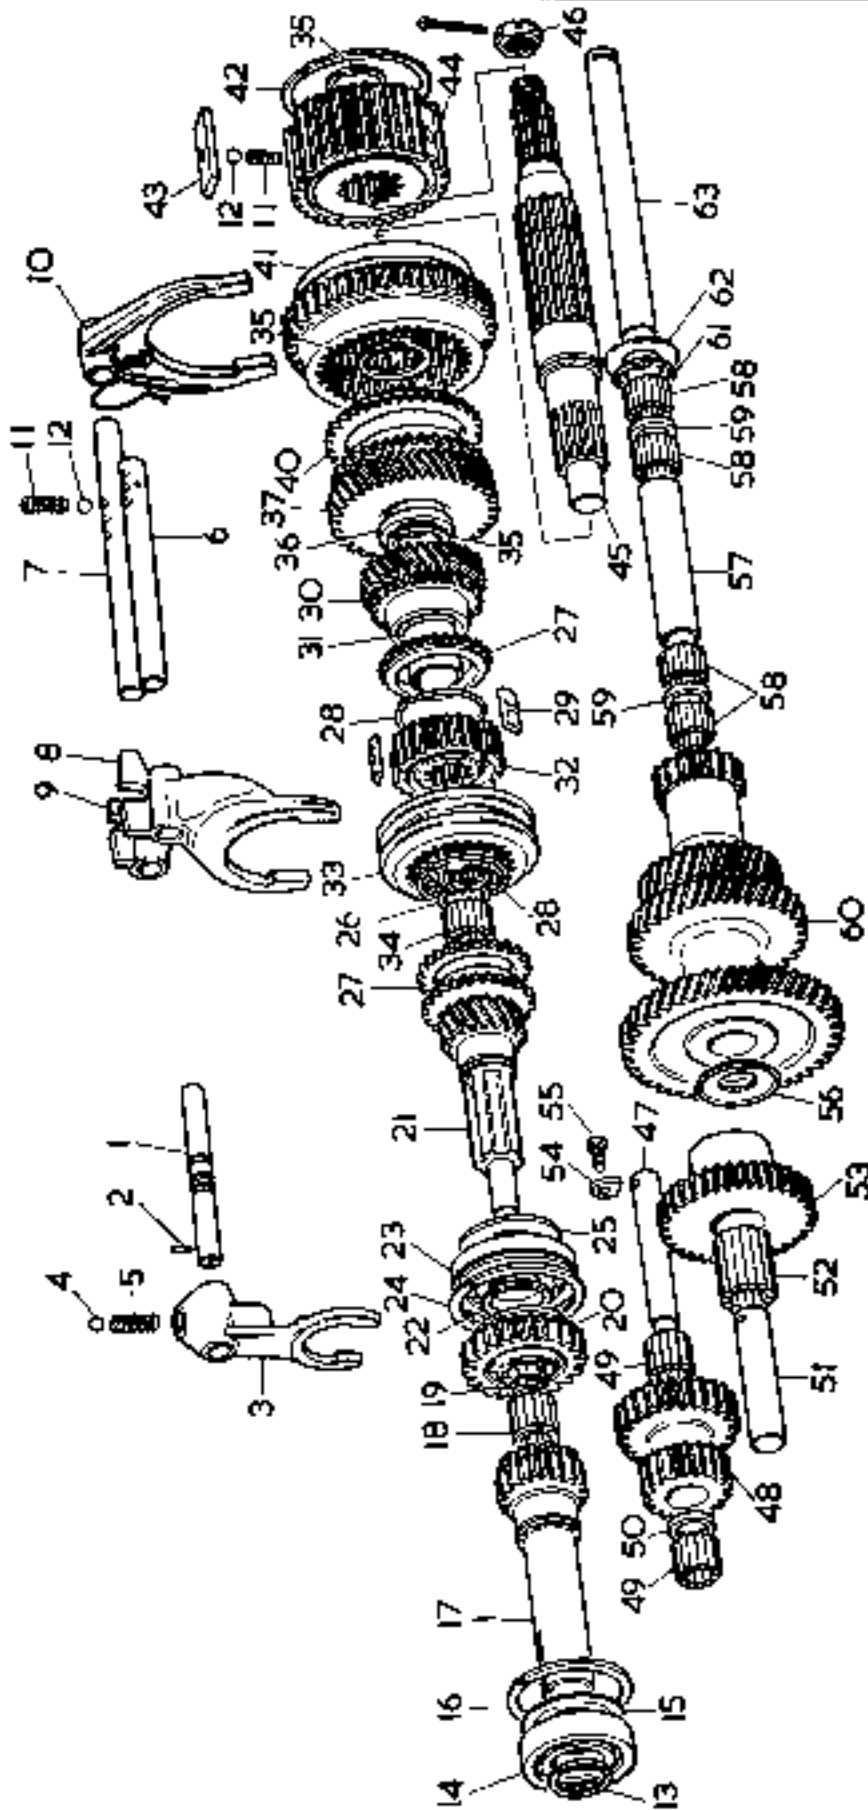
Forward Reverser 4 - Speed Box (W/Shift)
